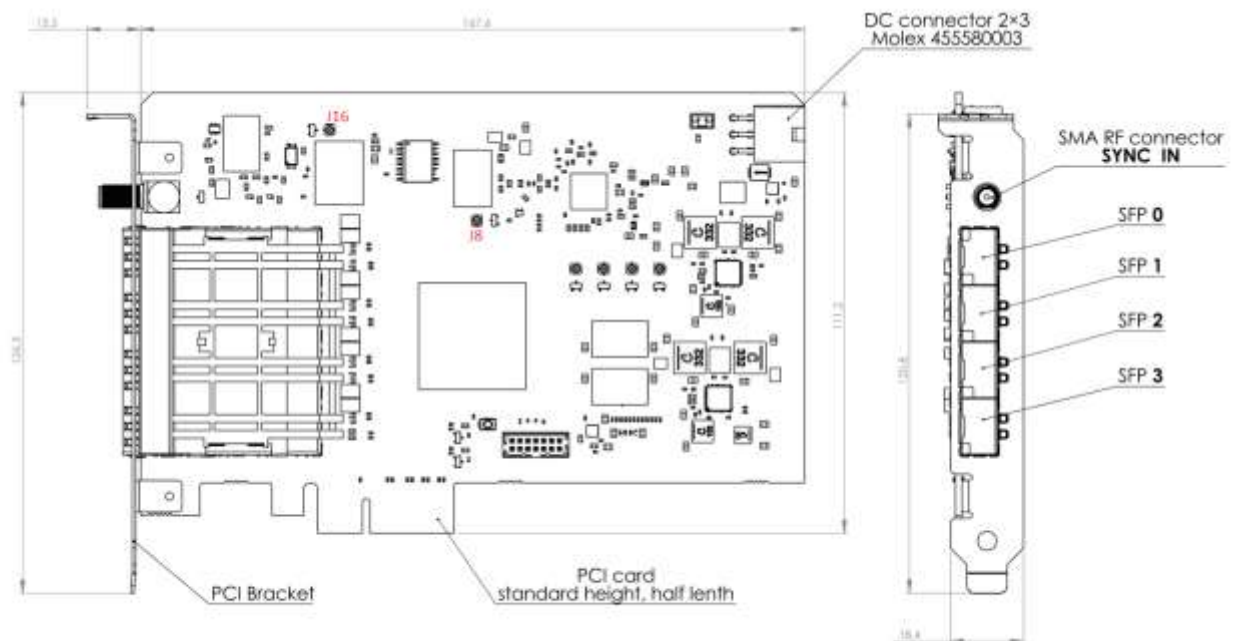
PCB top side and front panel views for type A and type B boards (dimensions in millimeters)
